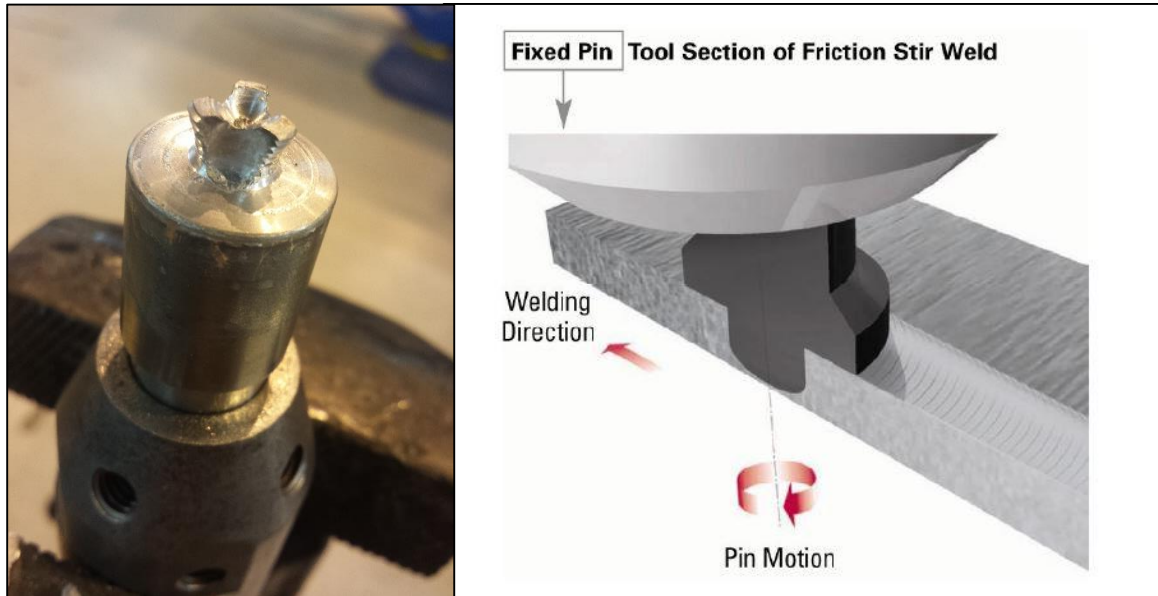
Fix Pin Friction Stir Weld Tool
